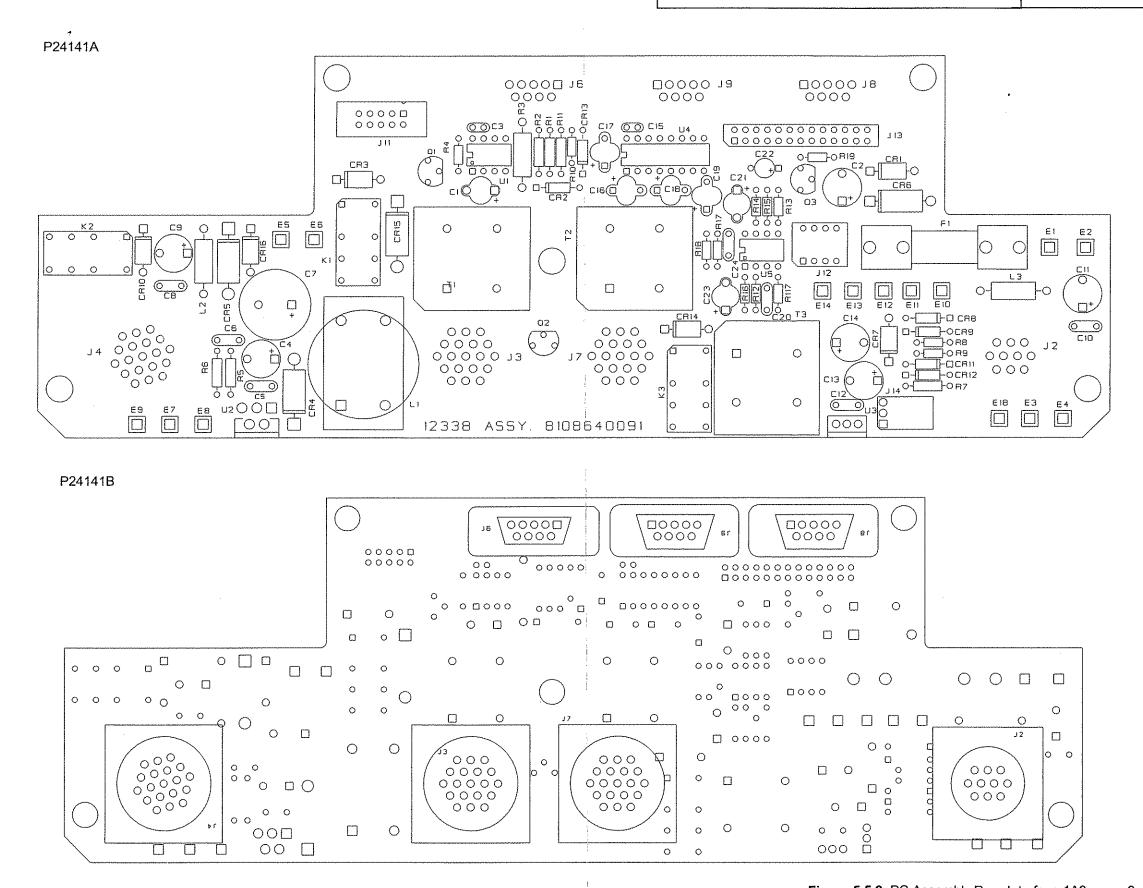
PC Assembly Rear Interface 1A3, page 2 of 4
